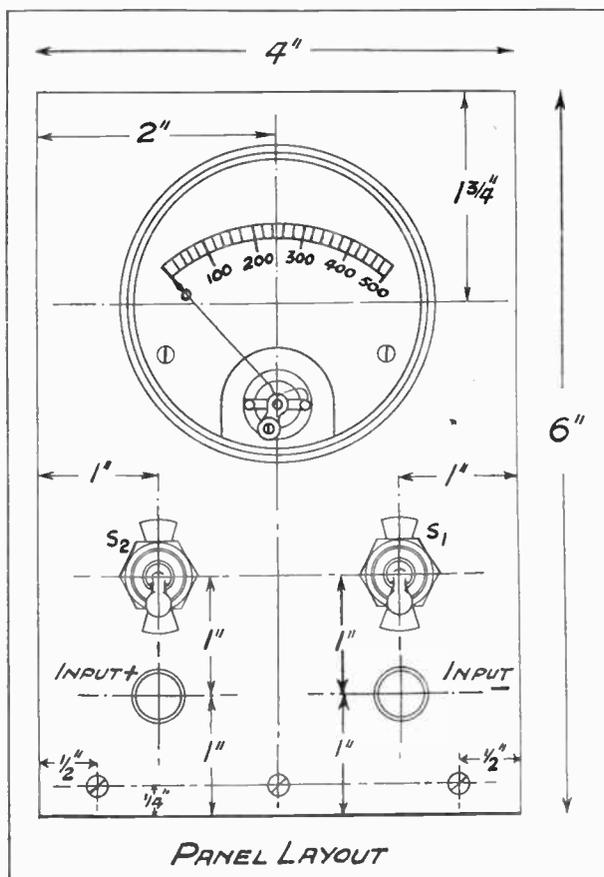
Complete details for marking out the panel prior to drilling operations.
